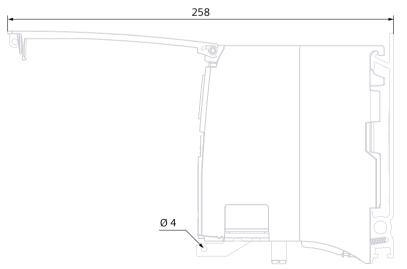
Dimension drawing of the CPU 1513R-1 PN, side view with front flap open
